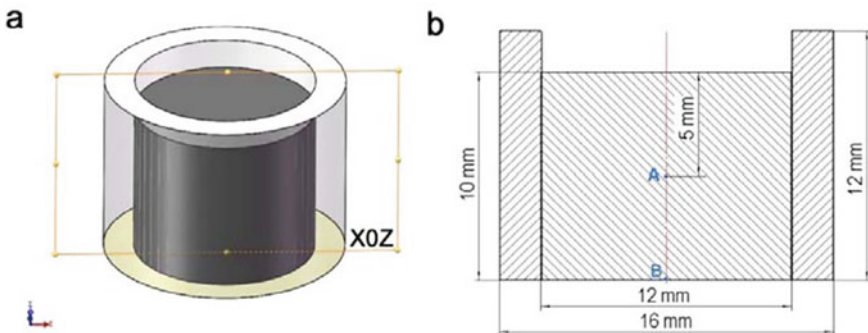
Schematic diagram of a 3D physical model, b cross section and geometric dimensioning
